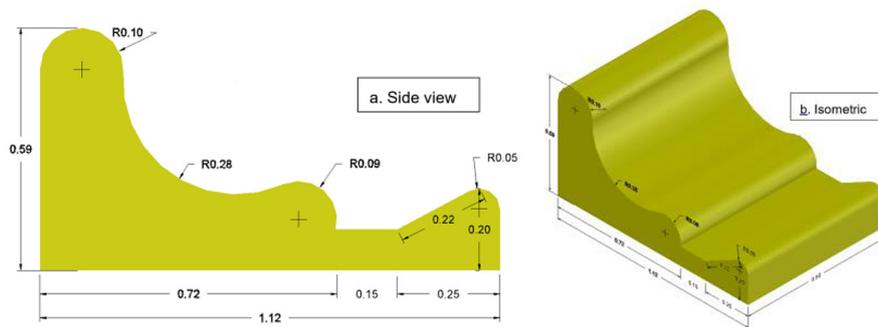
Geometrical shape of SU2: (a) side view, (b) isometric
